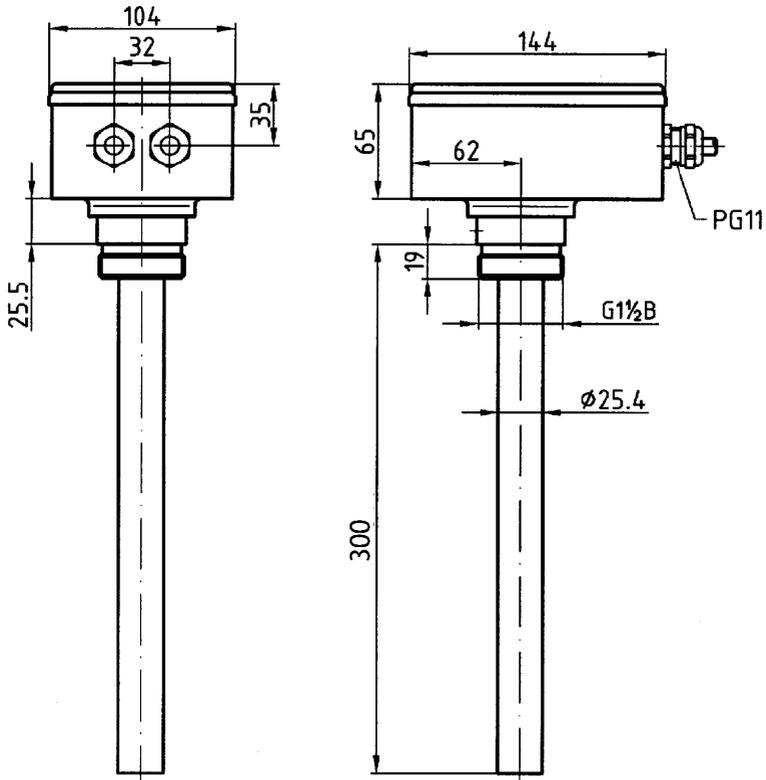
ENT 7 with rod probe, PTFE fully insulated (dimensions in mm)
